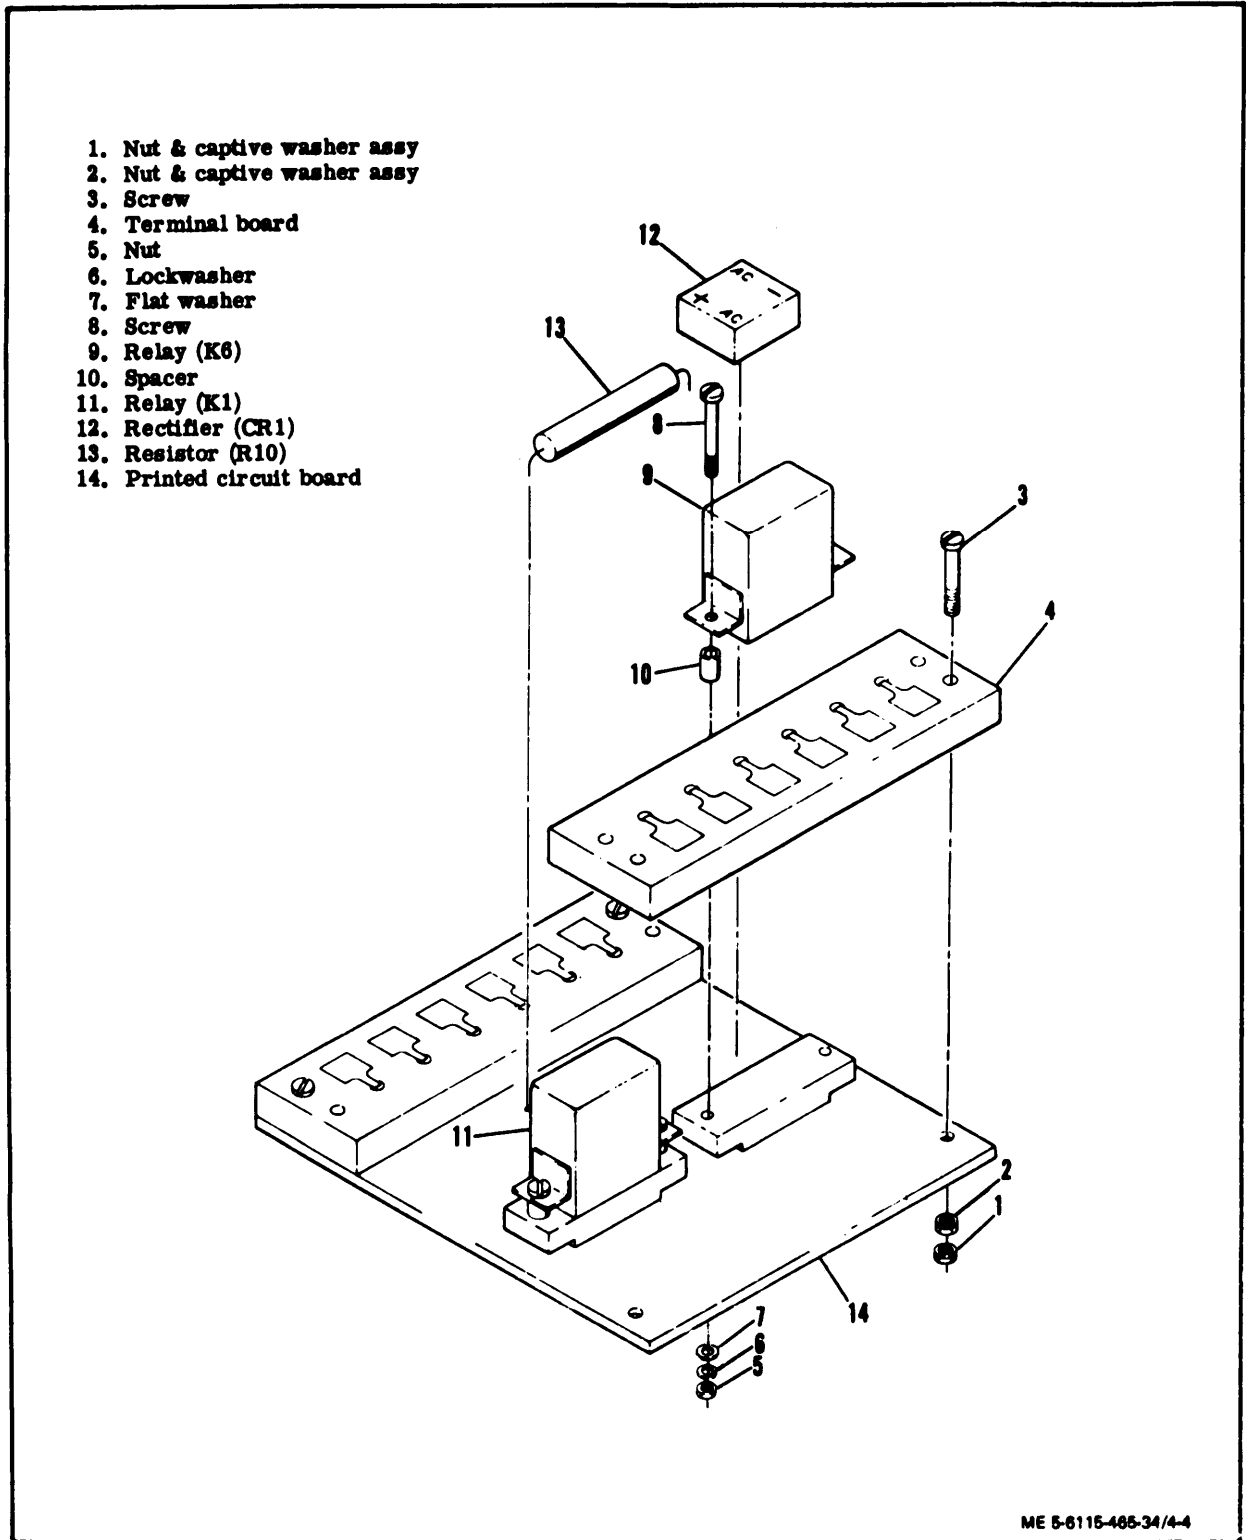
Control Cubicle Relay Assembly, Exploded View
